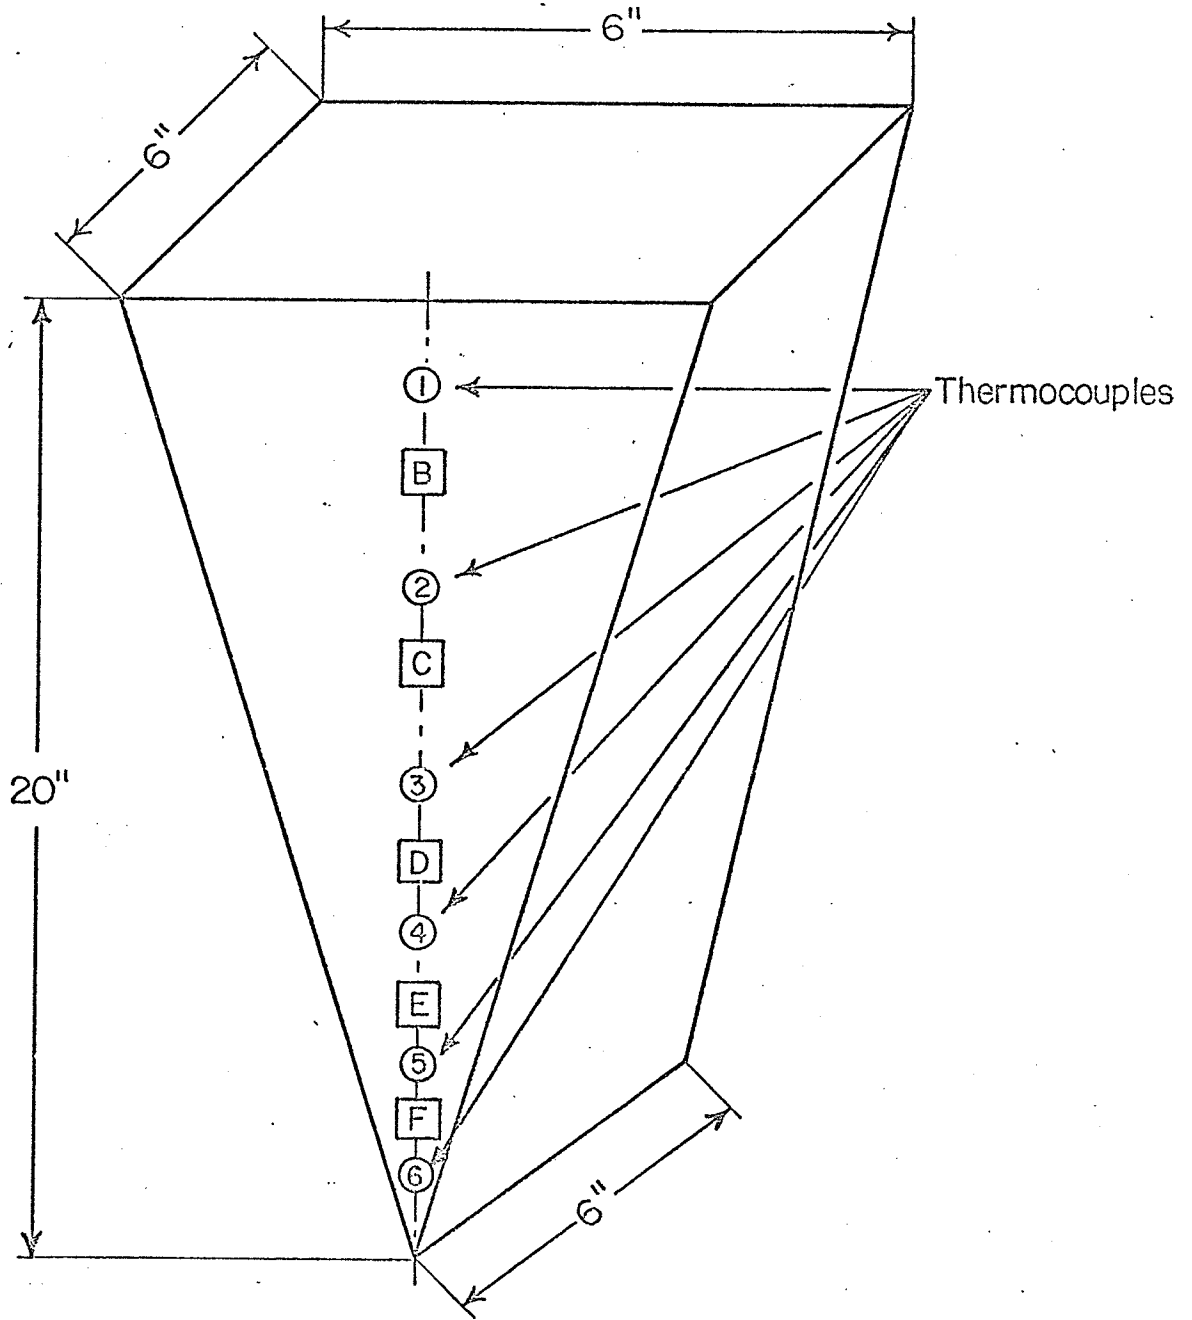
B Section and thermocouples arrangement in the wedge shaped castings.
